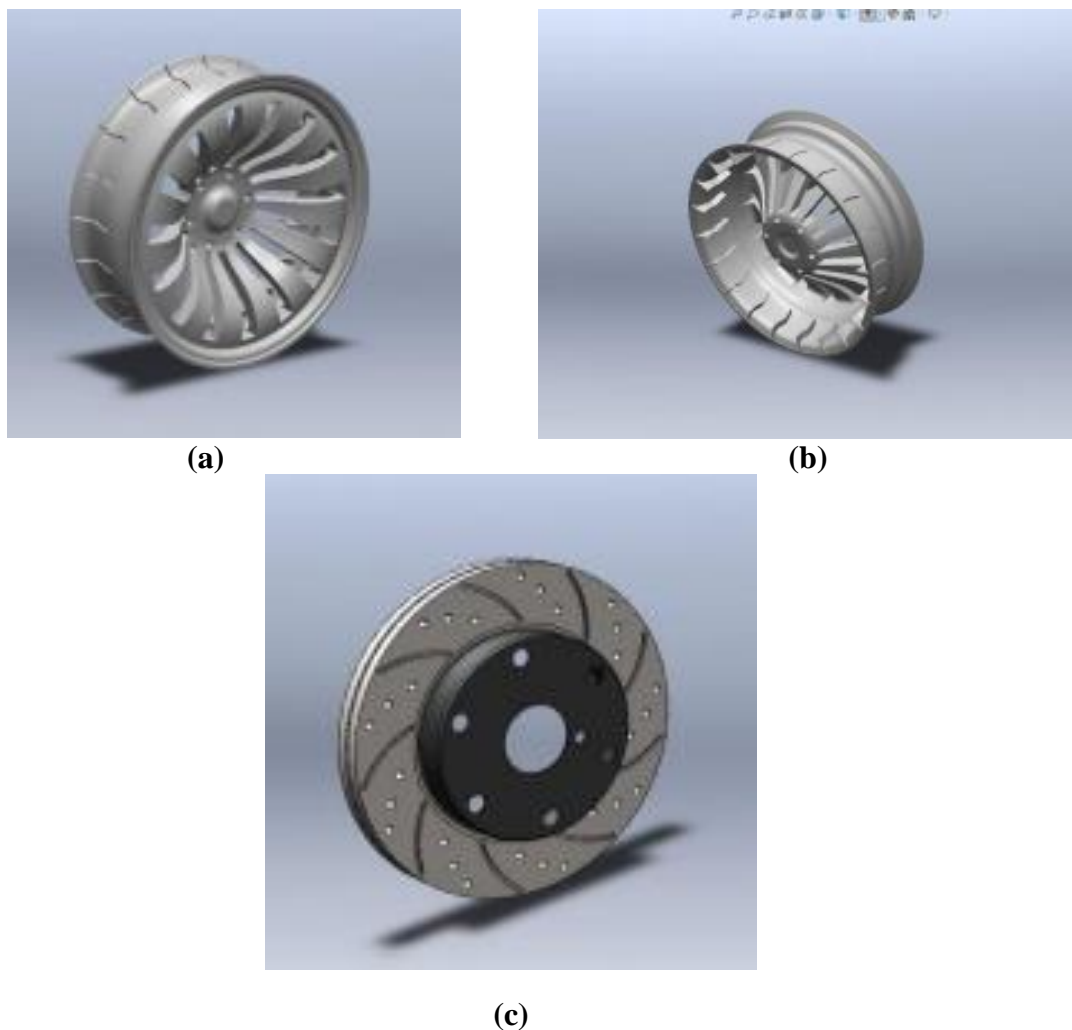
3D Modelled Magnesium Alloy with Fins (a) Inner Side and (b) Outer Side (c) Brake Disc Rotor
